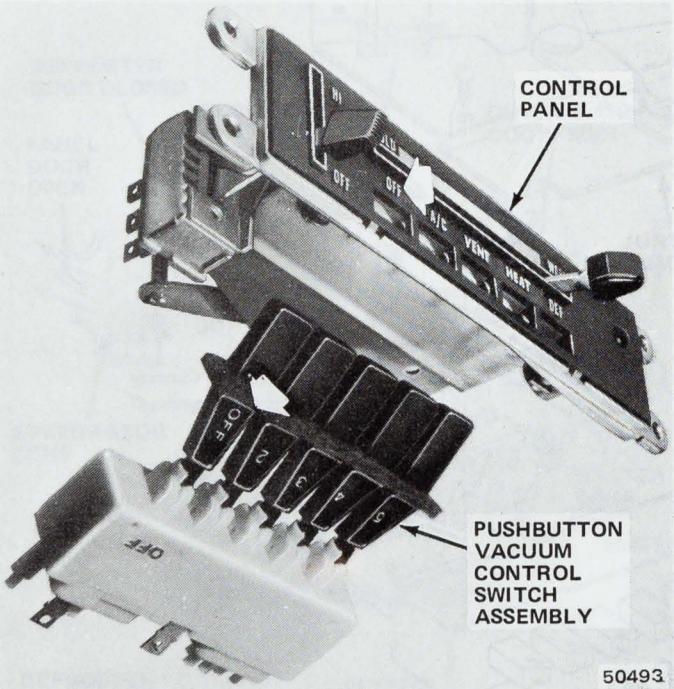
E-26 Installation of Pushbutton Vacuum Control Switch
